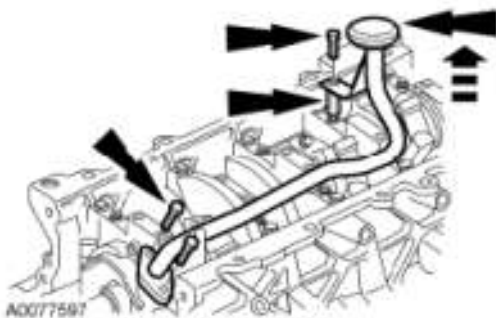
Locating Bolts, Oil Pump Screen, Pickup Tube And Spacer
